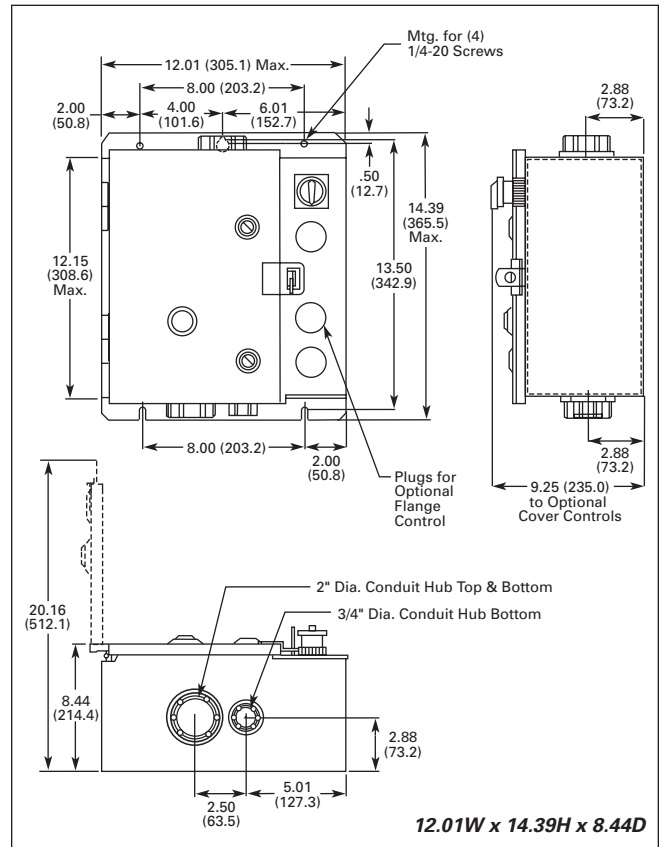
Box 6A, Type 4X — Approximate Dimensions in Inches (mm)
